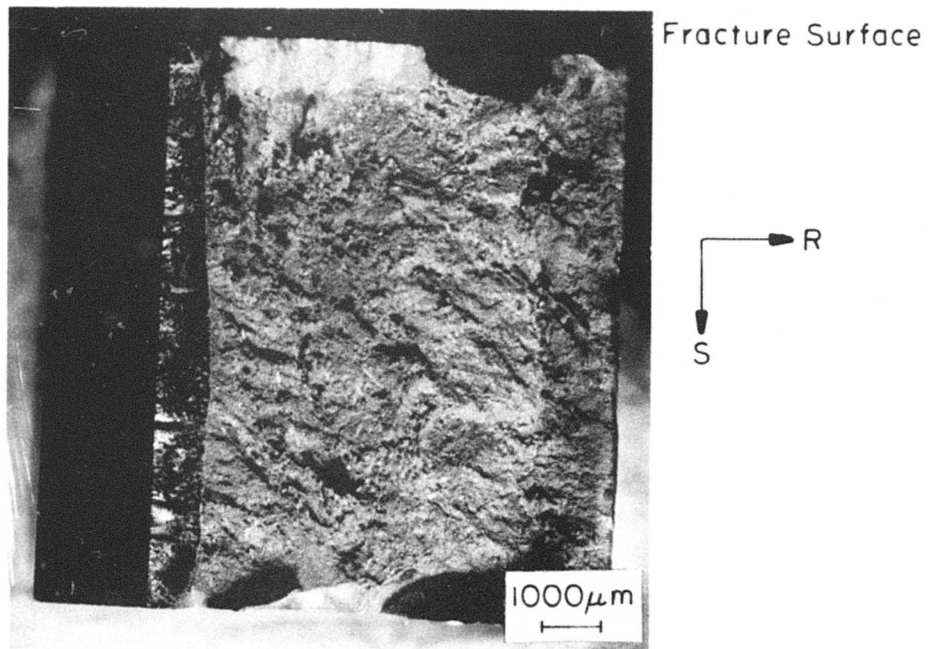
Alloy 227, sample 7LRE2. Fracture surface X8, crack path X500.
